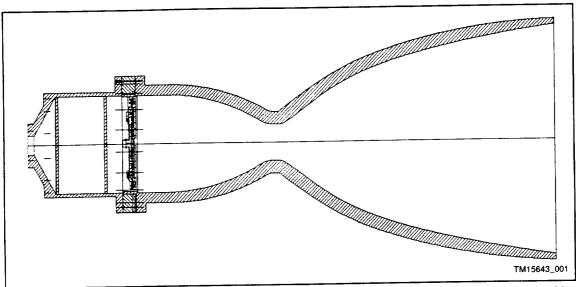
USFE Thrust Chamber Assembly. TCA consists of oxidizer dome, catalyst bed assembly, fuel injector, and ablative chamber/nozzle. The chamber produces 10,000 lbf of thrust in space at a chamber pressure of 500 psia with an expansion ratio of 40.
